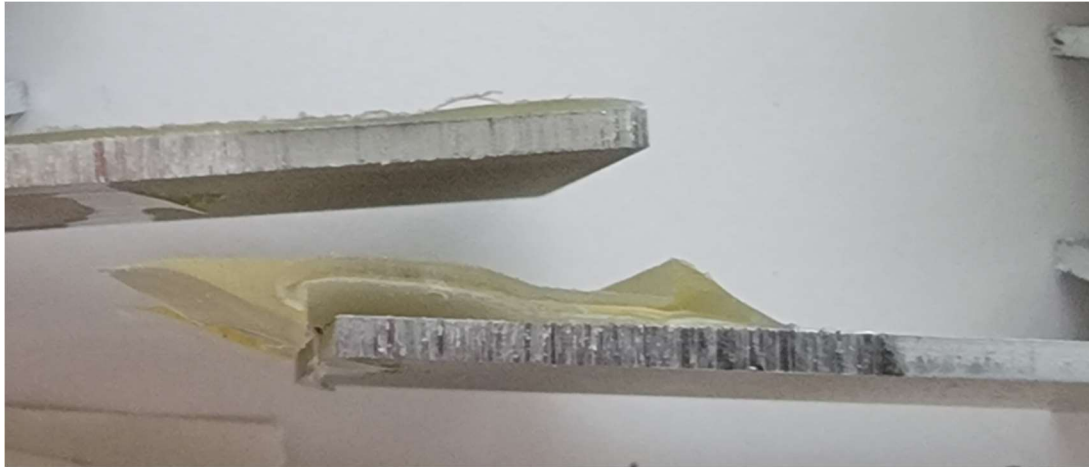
Photograph showing the adhesive fracture representing both the MDI-P2000 and MDI-P1000 system.
